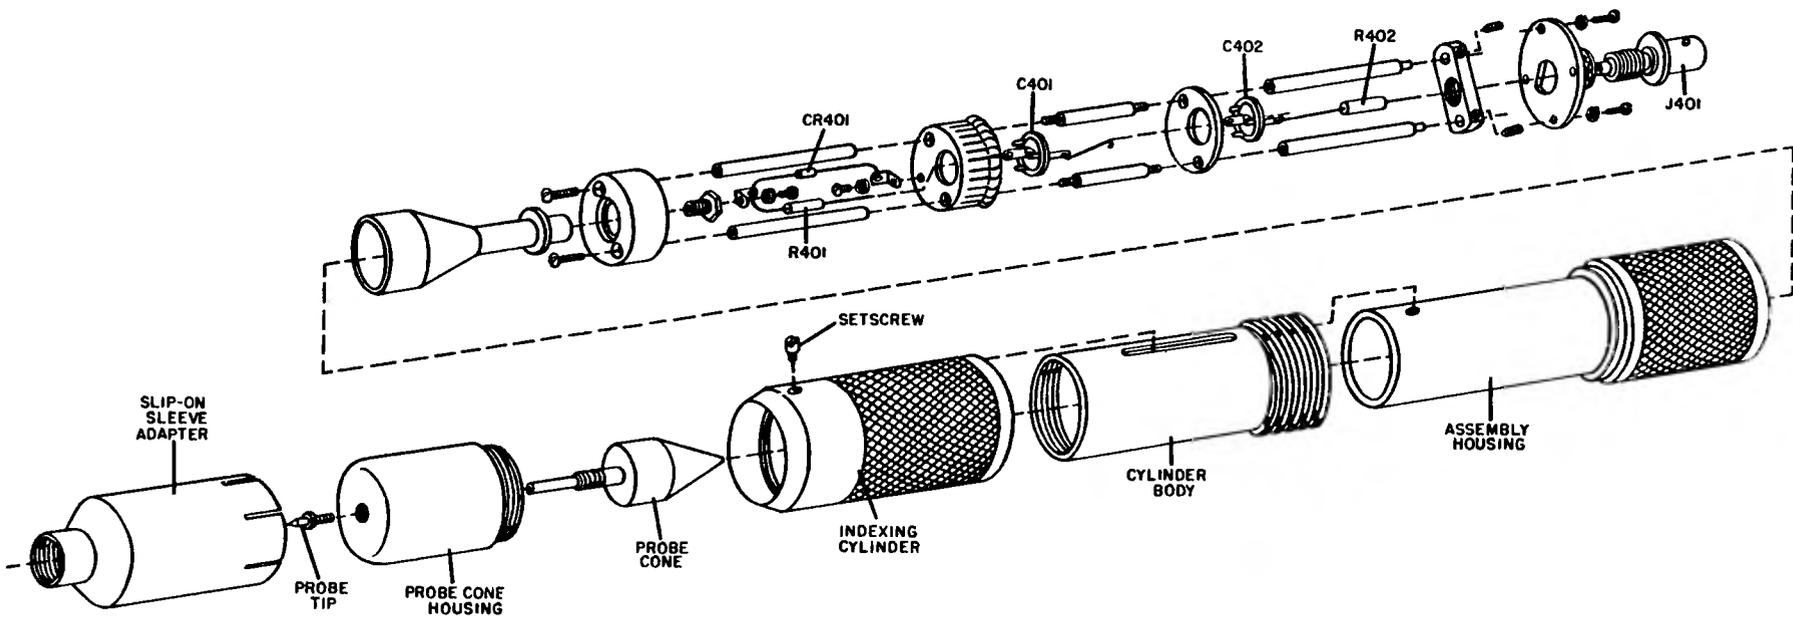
RF Coupler-Detector CU-220/TRM-1, Exploded View
